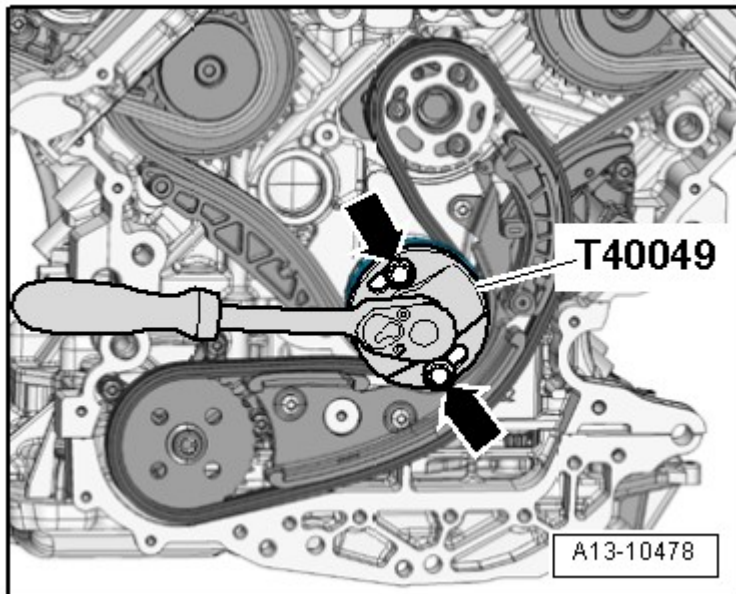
Identifying Key T40049 At Rear On Crankshaft Using Old Bolts For Dual-Mass Flywheel, Installation
